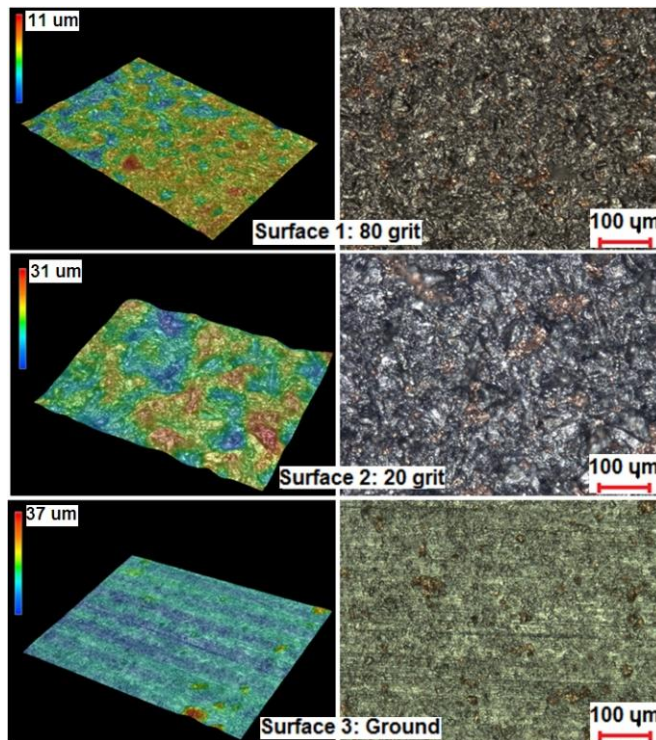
Post-spray Invar Surface Morphology (SST-C5003 Copper, Set 1) on Three Dimension Topographical Mould Surface(left) and Top View of Mould Surface(right)
